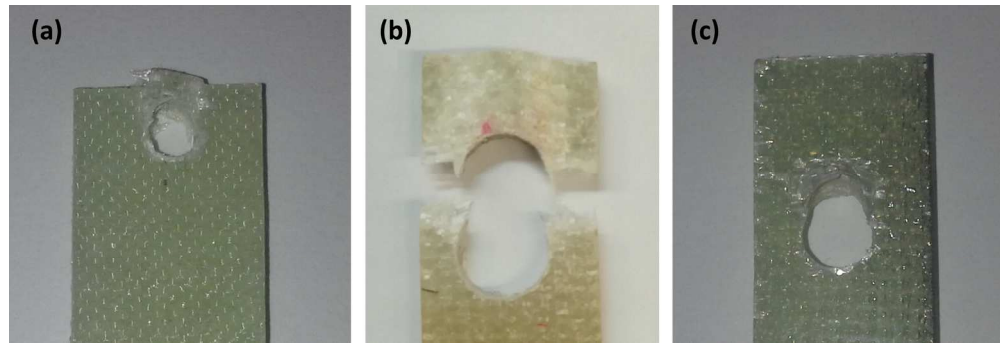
Images of a) shear out fracture on G_4_4_15 b) net tension fracture on G_8_8_15 c) bearing fracture on G_6_15_15
